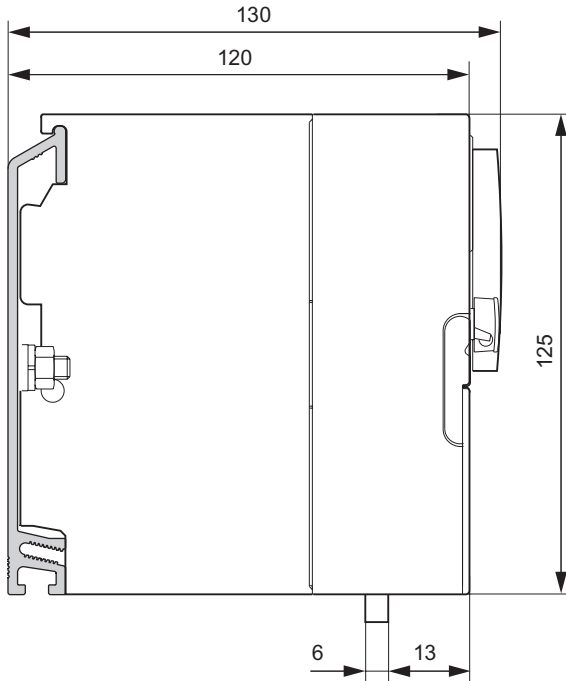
Dimensional drawing power supply module PS 307; 5 A with CPU 313/314/315/315-2 DP, side view
